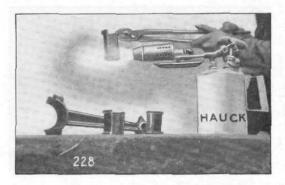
Hauck Torch No. 14 melting babbitt out of bearings. This torch is also used for melting the babbitt metal in pots, and for heating bearings when rebabbitting.
